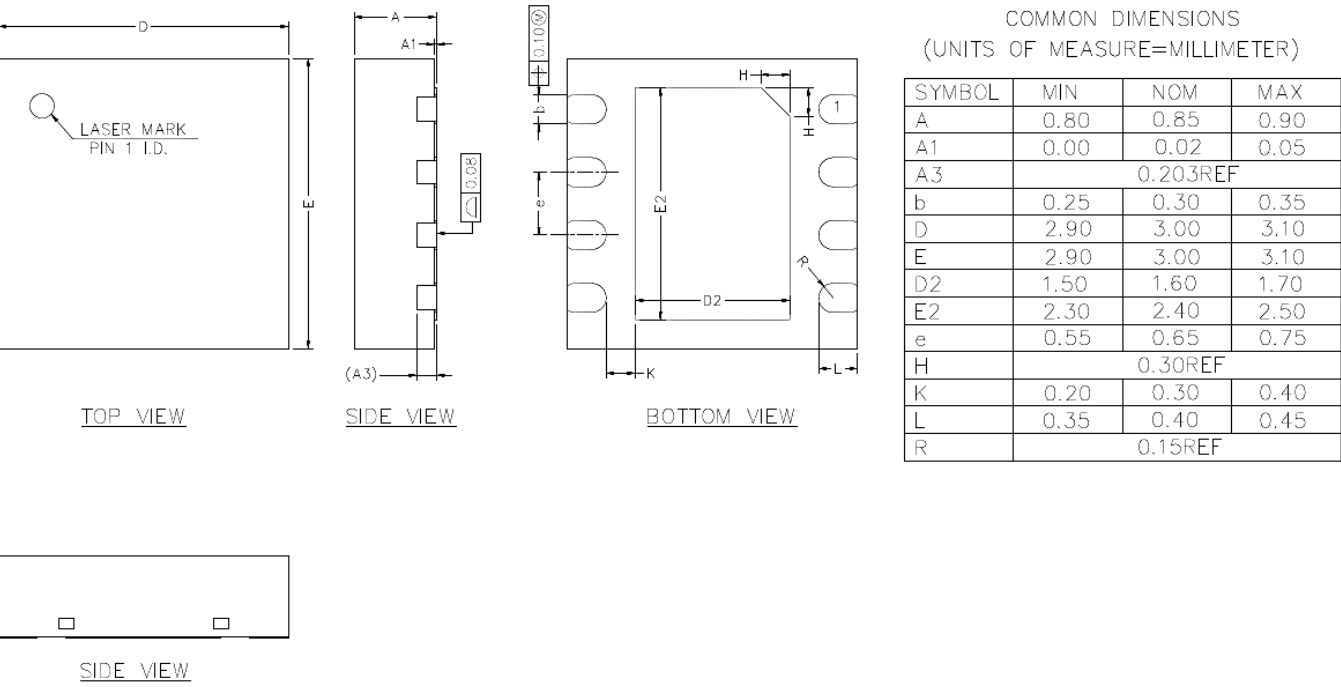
DFN8 Package Shape and Dimension in millimeters
